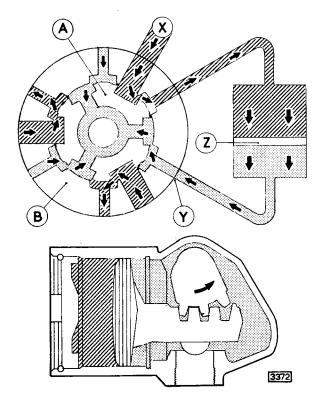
Operating diagram of the rotor valve (steering turned)
